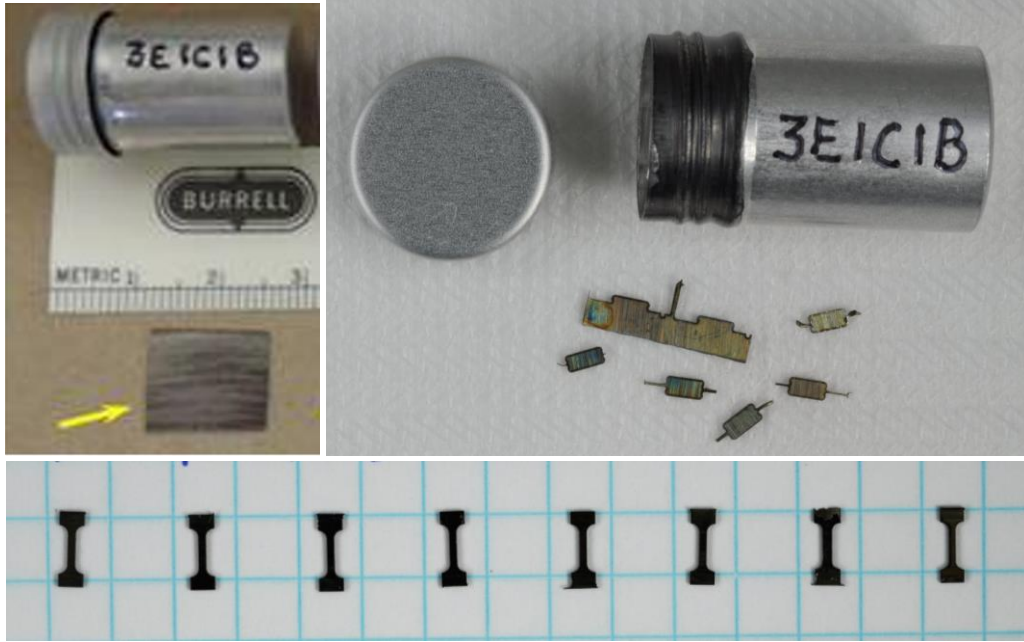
In-house manufactured tensile specimen. One may see images of the source irradiated plate of “Hex block material” (top left), remaining fragments (top right), and as-cut miniature tensile specimens with 2.5 mm gauge (bottom).
